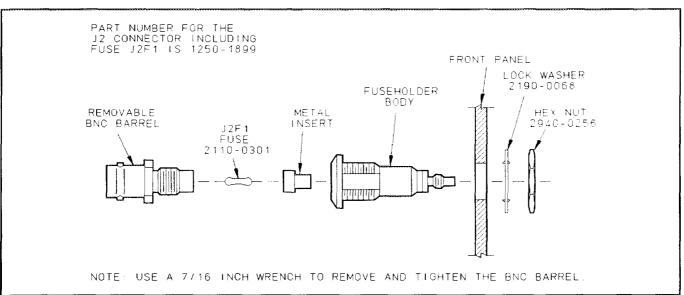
Details of INPUT 2 BNC Connector J2 and Fuse J2F1 Mounting
